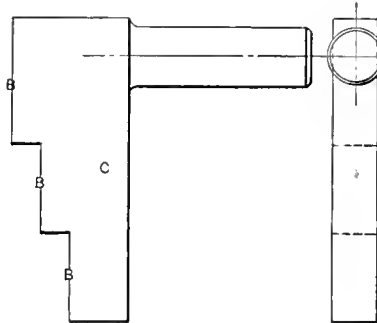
Guide for Turning Recess in Casting, Fig. 1, used in Combination with Tool in Fig. 2.
